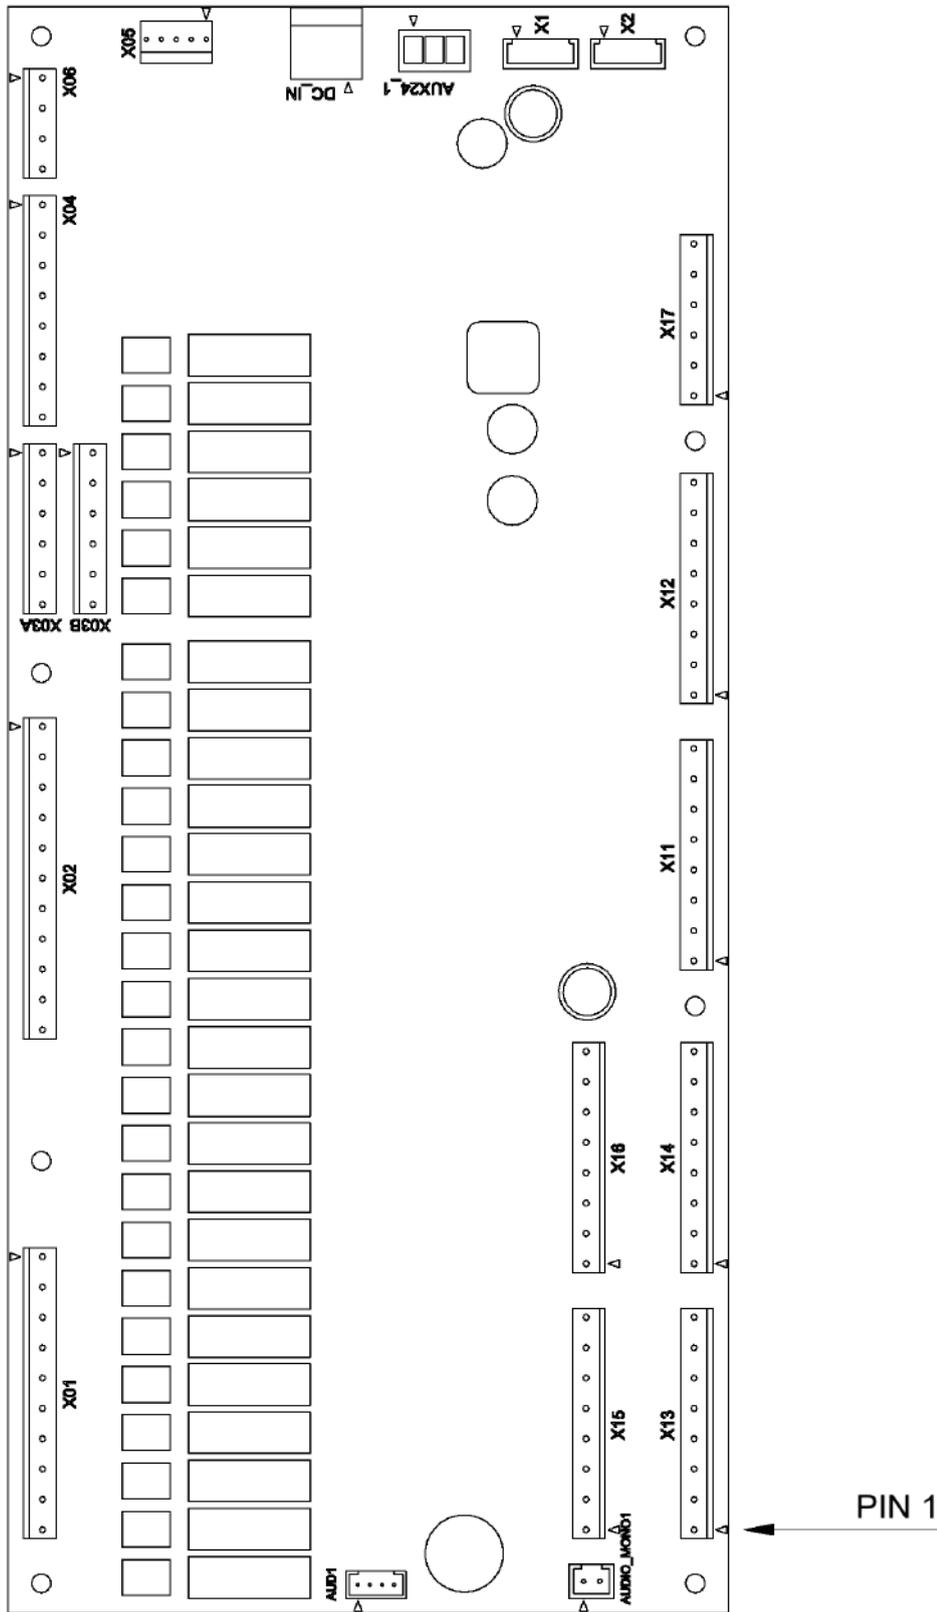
I/O board layout. Arrow heads indicate PIN 1.
